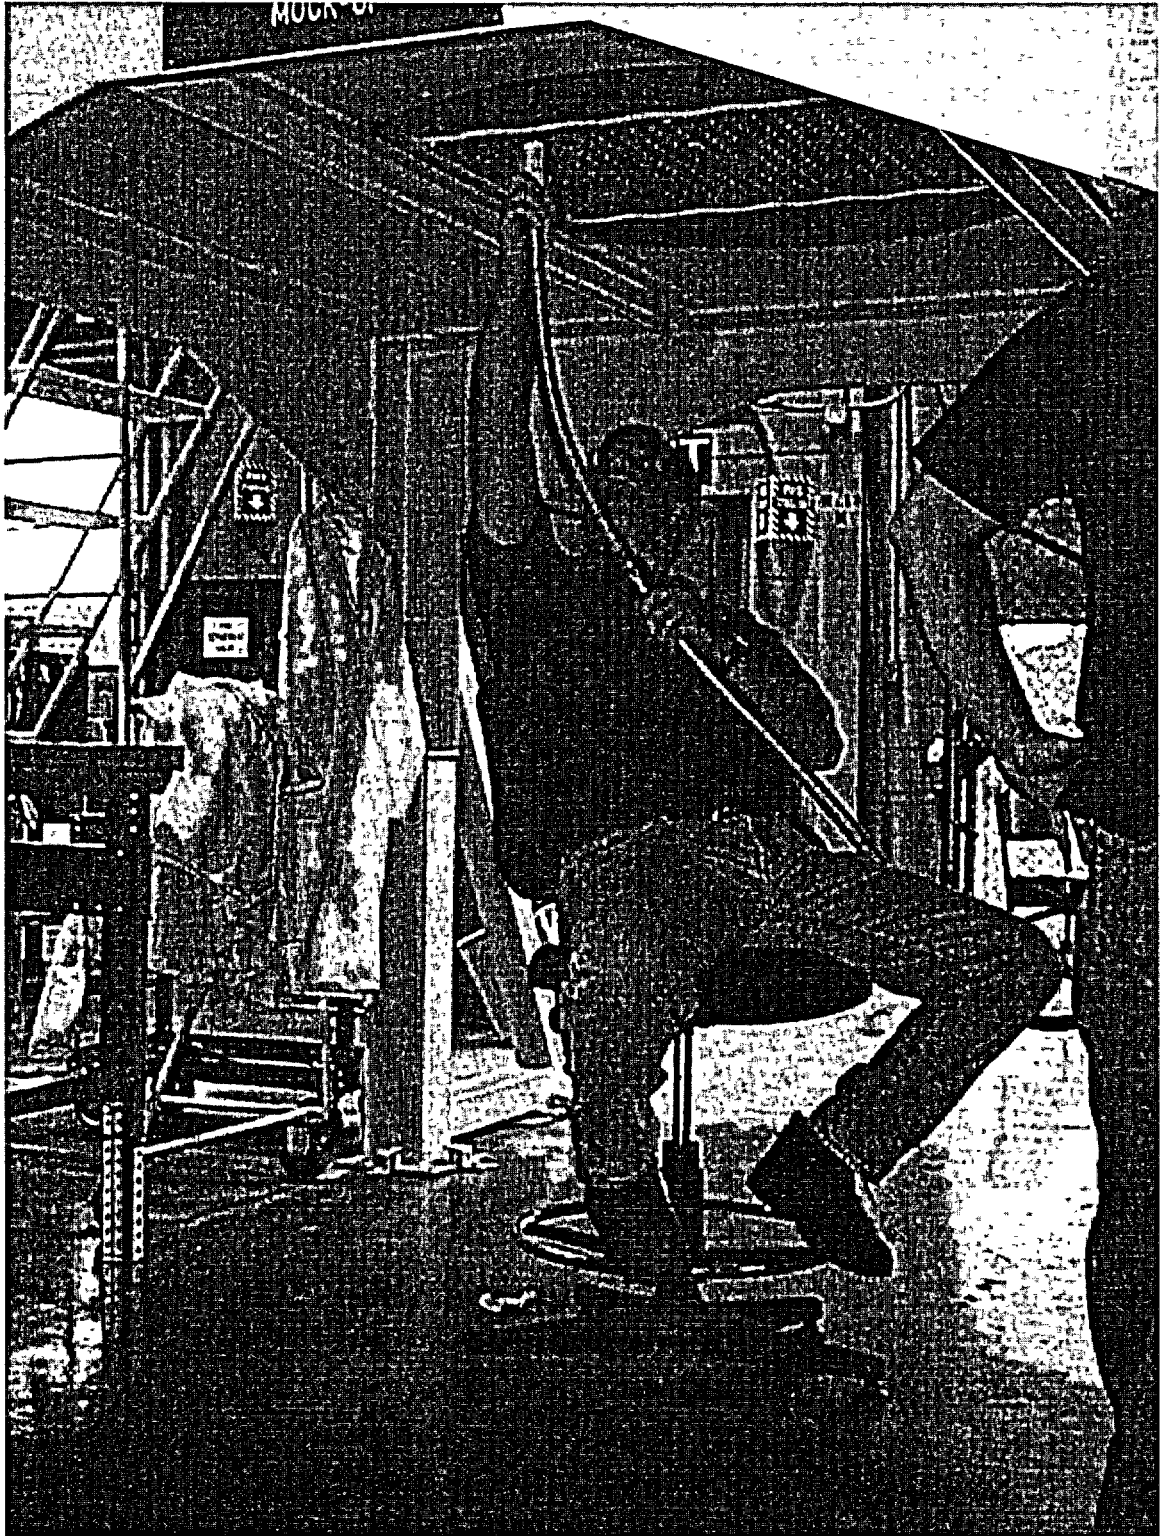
Photograph of underside of tube bundle. Conduit carrying the EC probe is shown being positioned under a tube.
